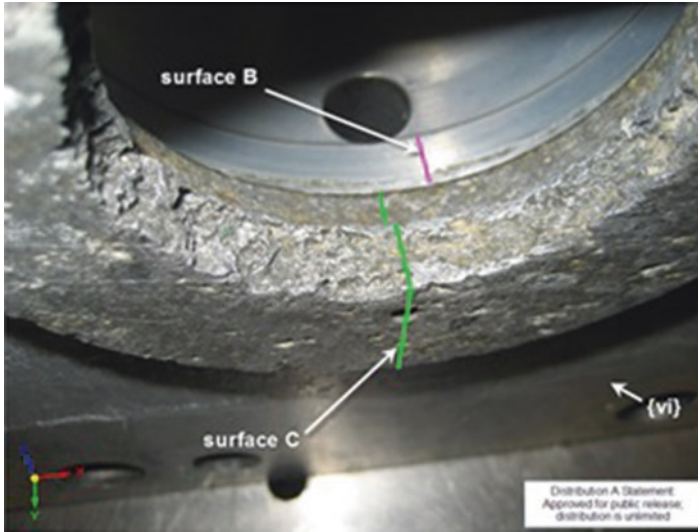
Close-up photo of seawater corrosion damage on the outboard portion and sealing surfaces on the valve actuator internal bore
